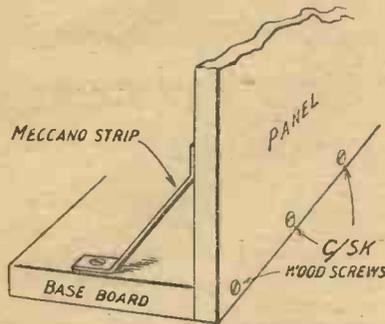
A Meccano strip may be used instead of angle brackets.
